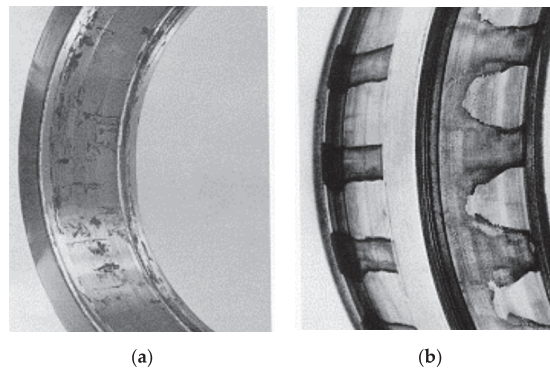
Traces of corrosion on the bearing surface: (a) Traces of corrosion on the outer ring of the bearing; (b) traces of corrosion due to the water impact on the inner ring of the bearing [33].
